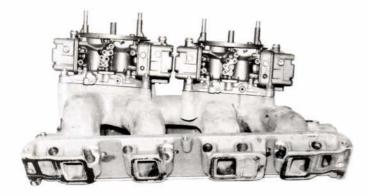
Dual 4-bbl. Holley Carburetors on "Medium Riser" Manifold
